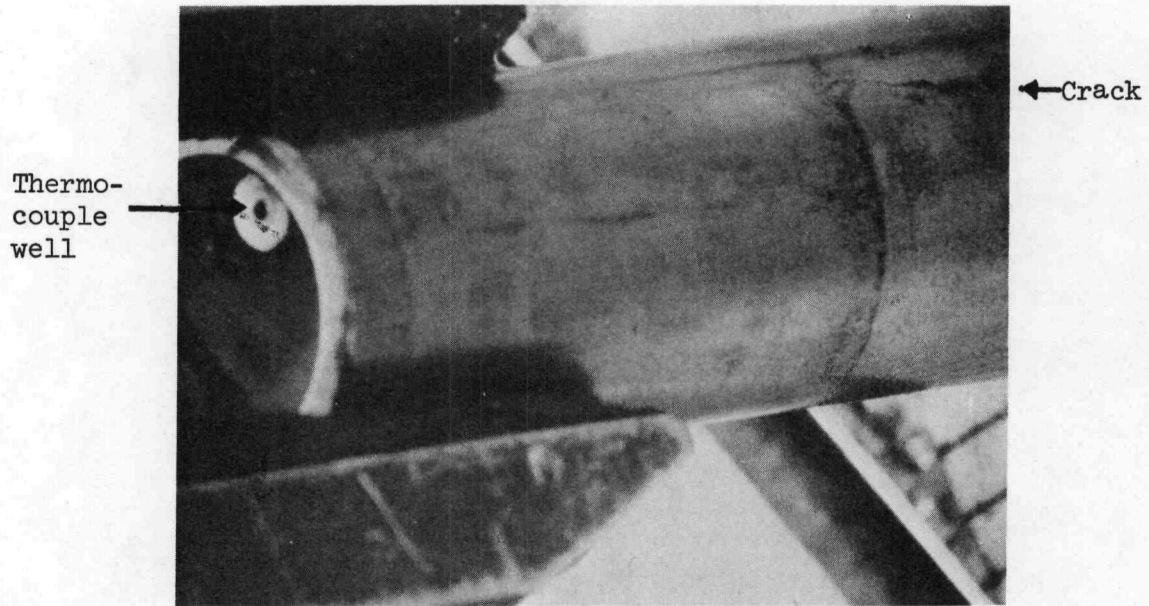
IC-13 emitter cut off from emitter stem, showing that the crack is located over the thermocouple well
